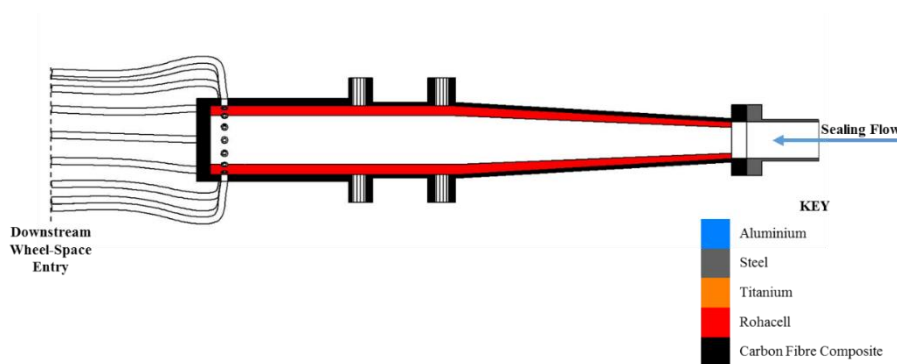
Cross-section of downstream sealing flow supply assembly indicating the materials used
